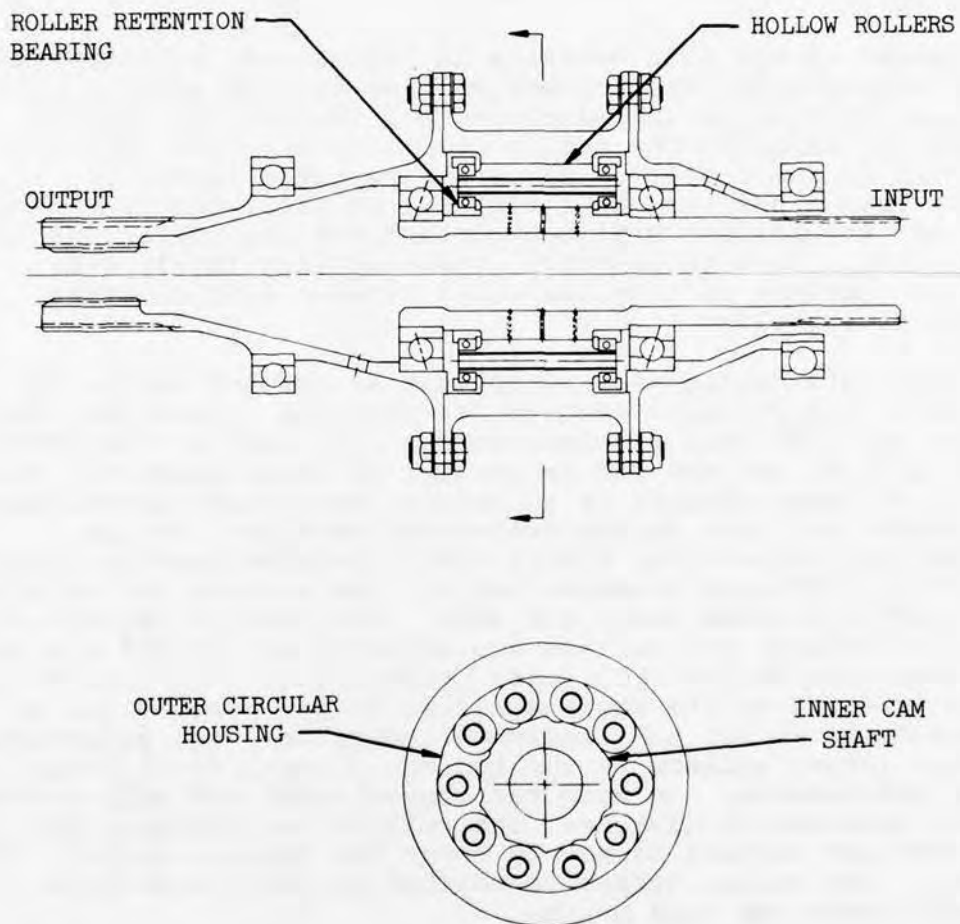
Ball-Bearing-Carrier Ramp-Roller Overrunning Clutch.
